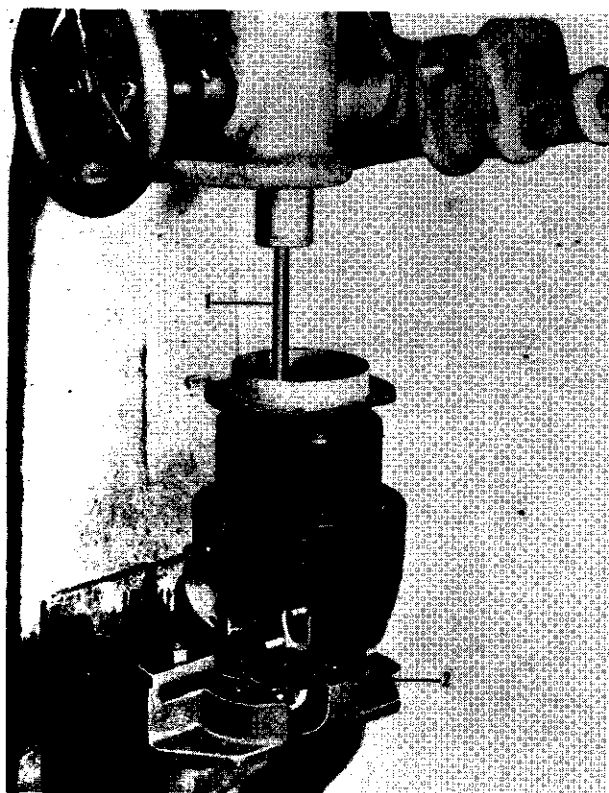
Expanding Spark Plug Hole Heli-Coil Insert
